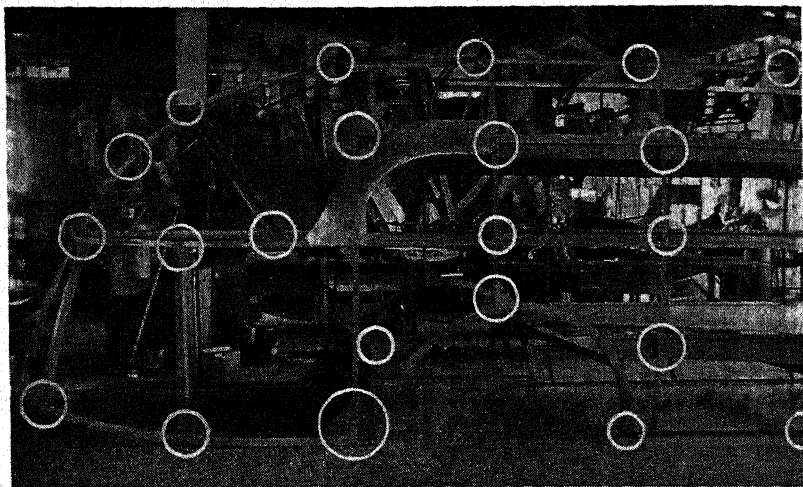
Rear end bus body framing. Circles indicate arc welded joints.
